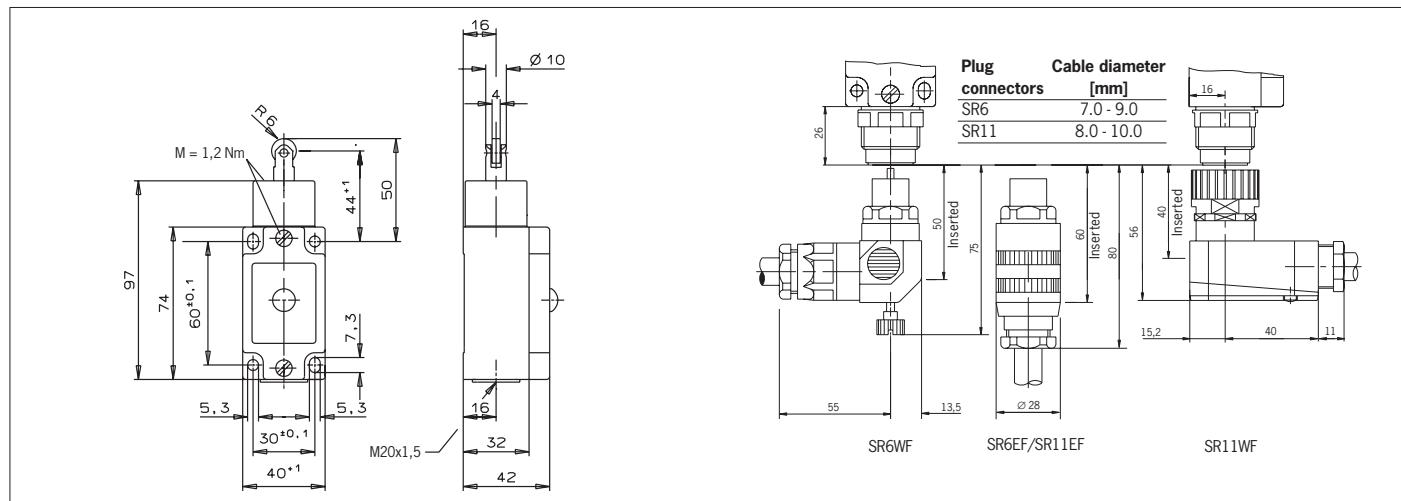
Dimension drawings NZ1... with cable entry and NZ2... with plug connector
